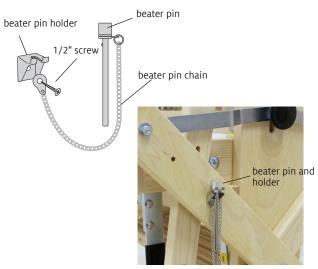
INSTALL THE BEATER PIN HOLDER
